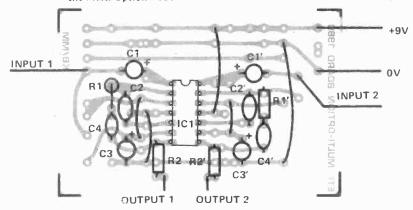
(below) Component overlay of the stereo preamp fitted onto the Multi-Option PCB.
